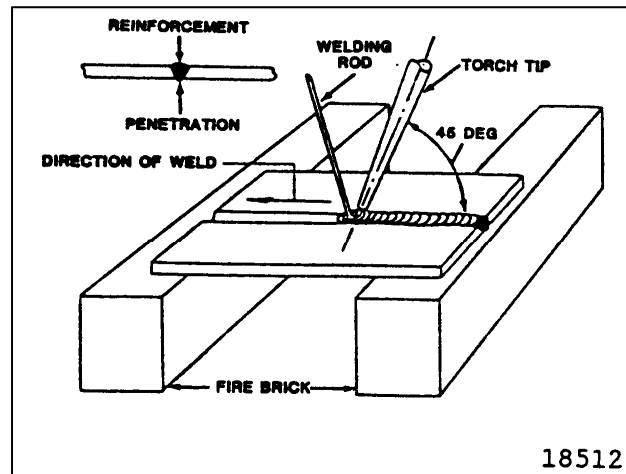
Position of Rod and Torch for a Butt Weld in a Flat Position
